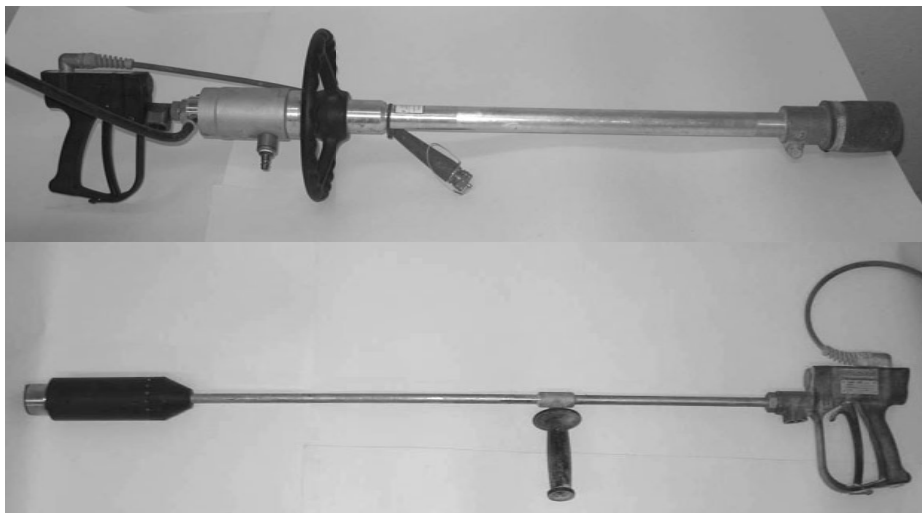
Examples of high-pressure rotating guns type SP 3000 PR2 (above) and SP 3000E (below)
